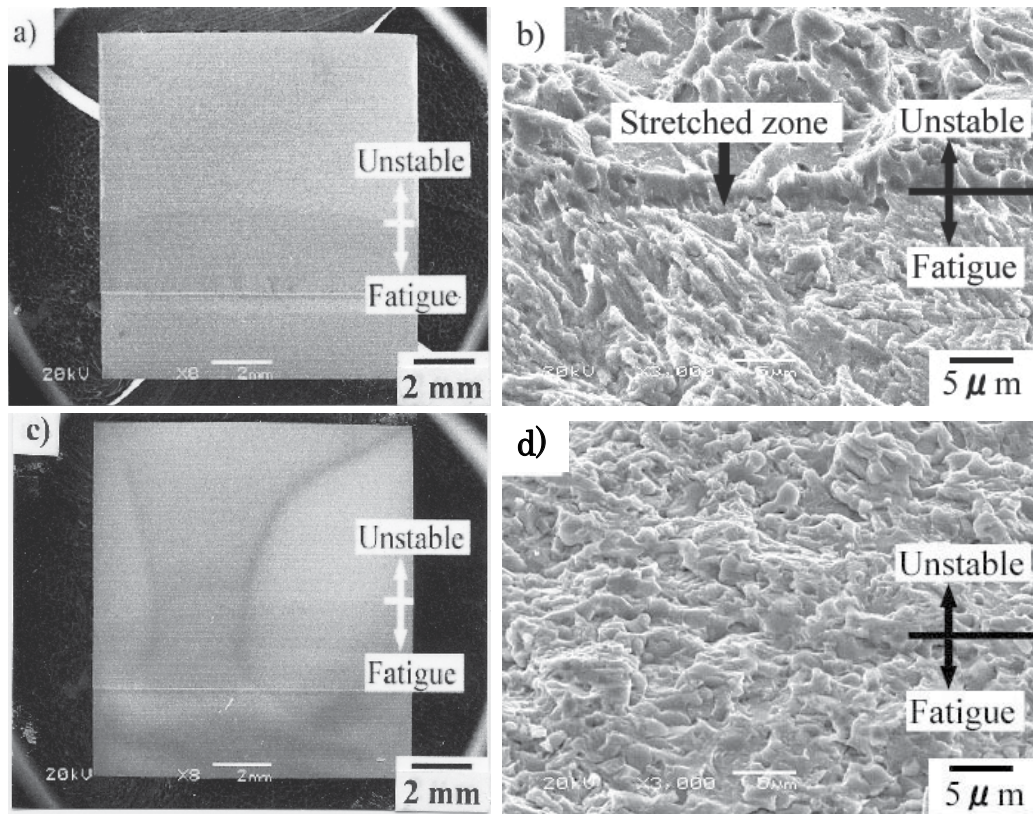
Stretched zone on three point bending fracture surface[3]. a), b) SKD61 c), d) HAP72
